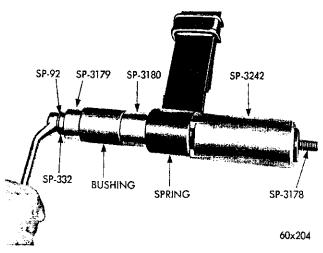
Removing or Installing the Spring Leaf Bushing Using Tool C-3709
